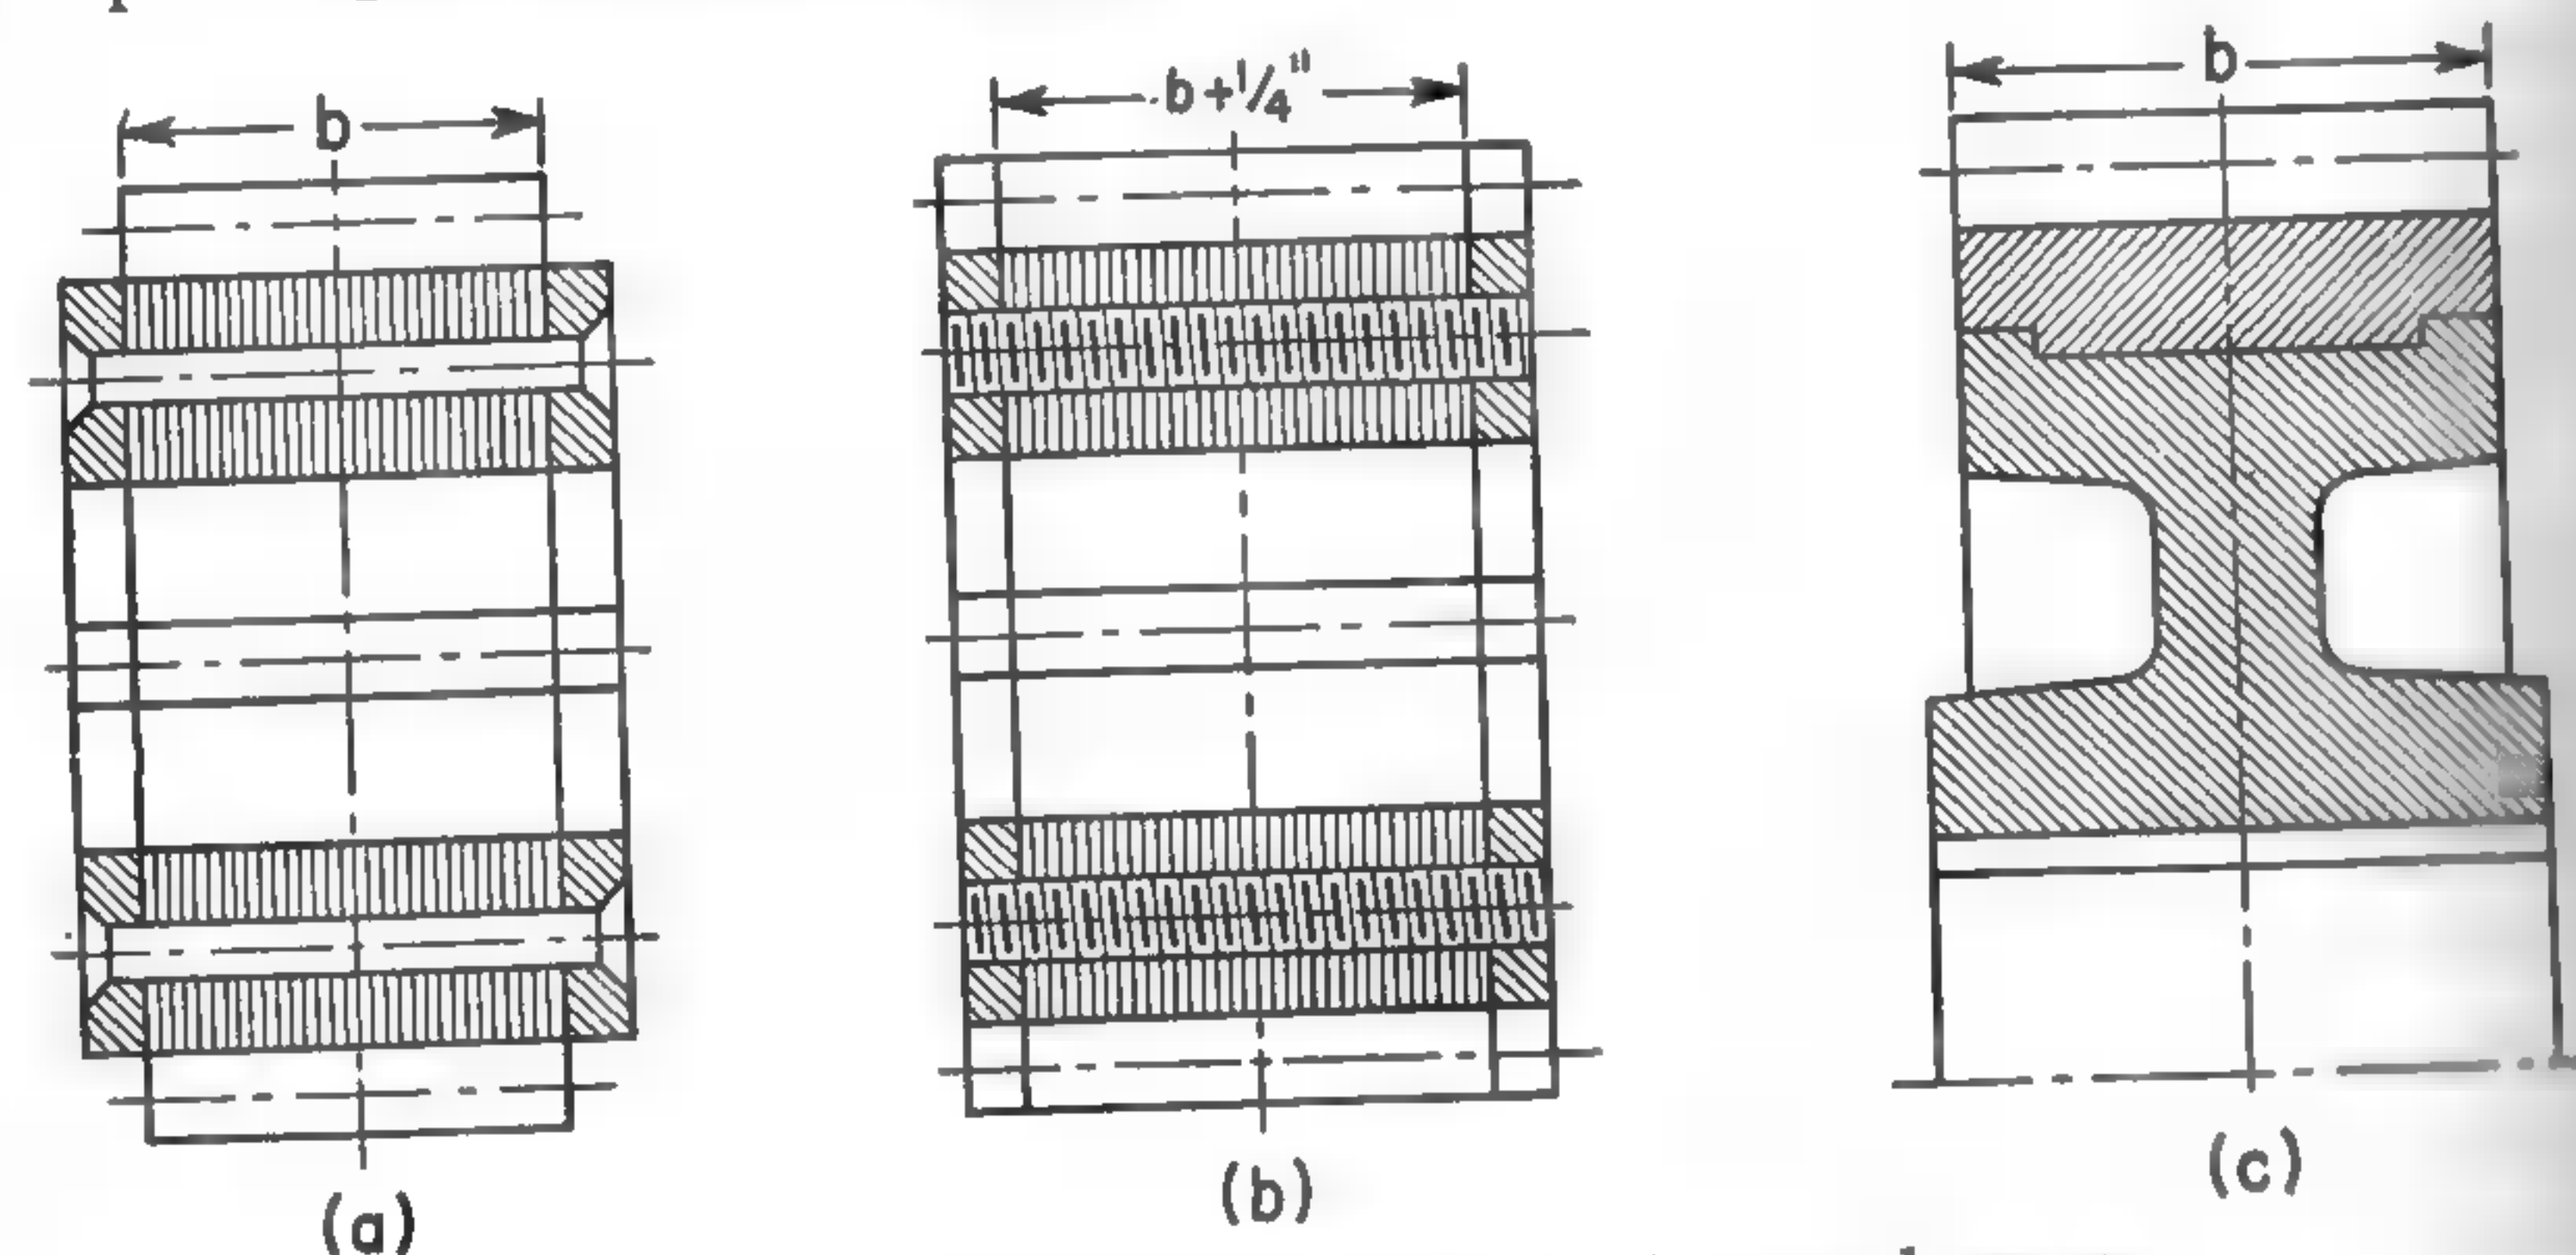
Nonmetallic-tooth pinions and gears.
